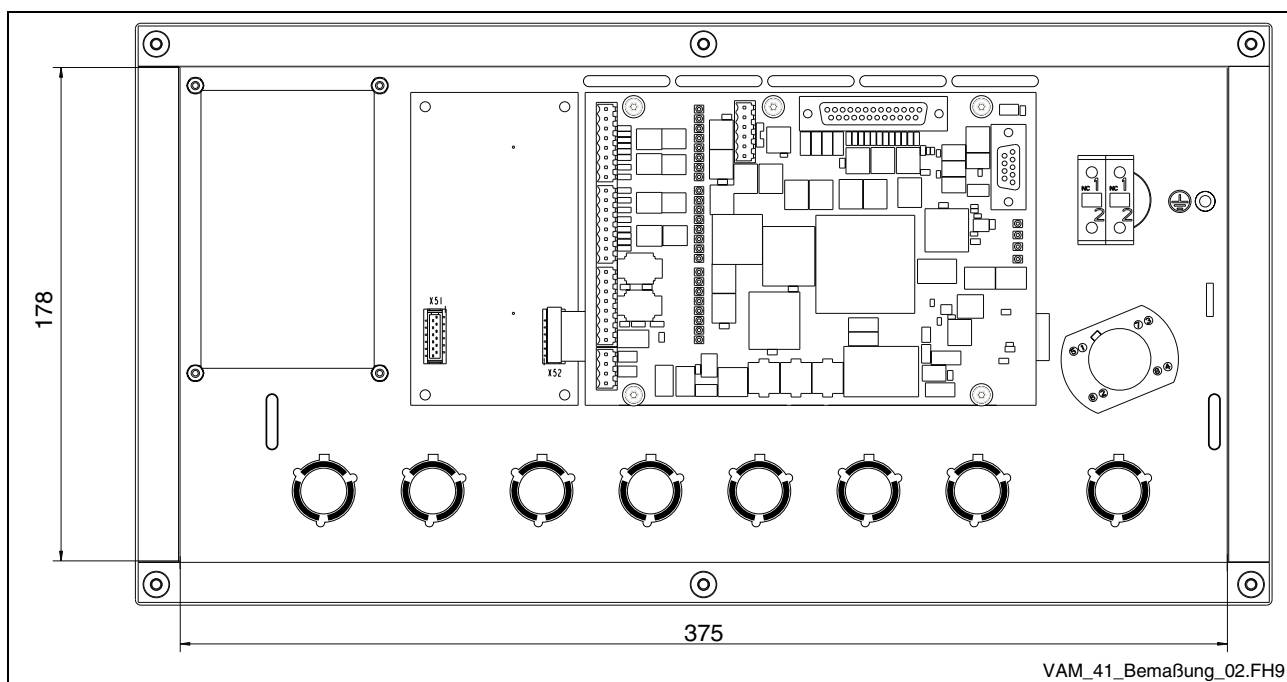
Housing dimensions VAM 41.1, rear view
